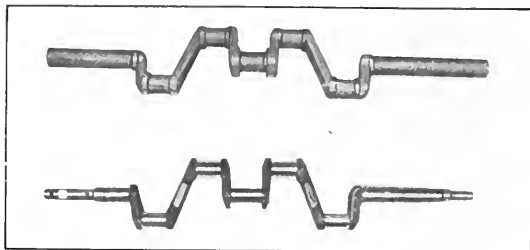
One of the Finished Crankshafts and the Rough Drop-forging
